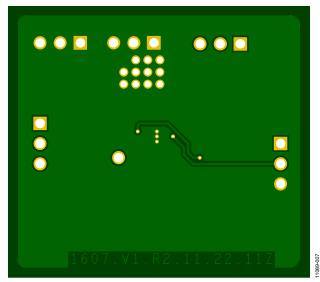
ADP1607 Boost Application PCB Bottom Layer
